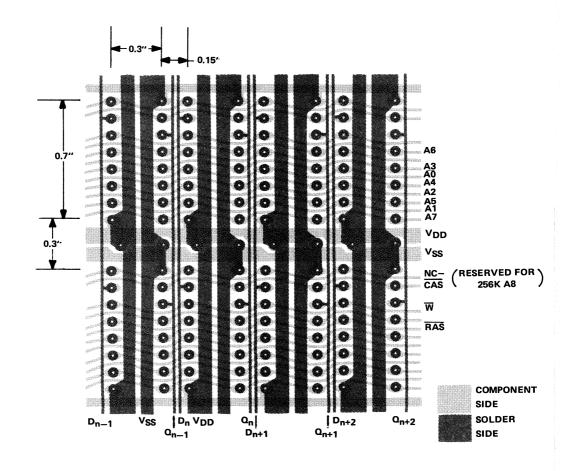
PC BOARD LAYOUT FOR TMS 4164 (SHOWN 2X)
